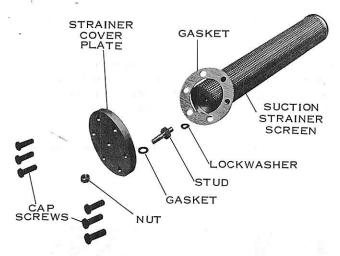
SUCTION STRAINER SCREEN ASSEMBLY — 12 & 16 CYLINDER COMPRESSORS
